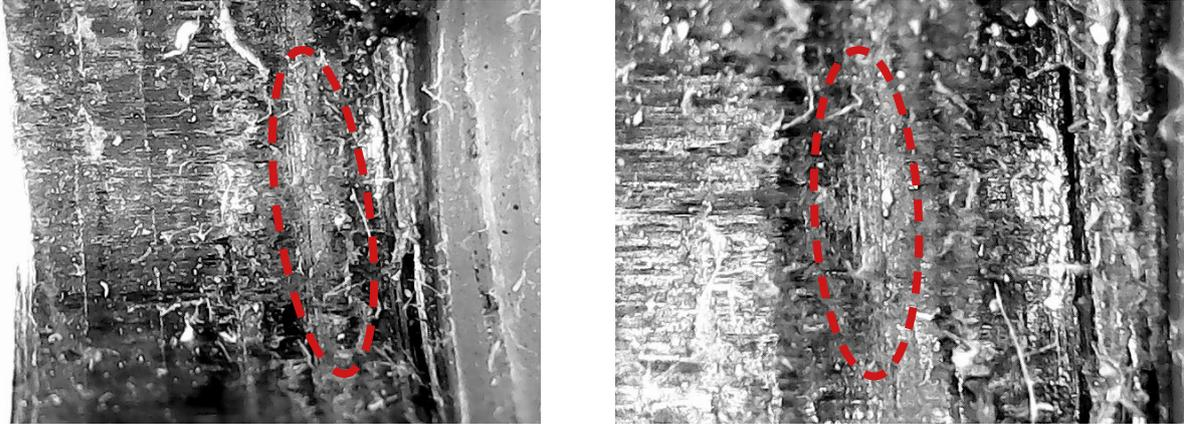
Detail photographs of the sheared threads on the nut (AN365-524A) of the front outer mounting bolt of the left main landing gear
